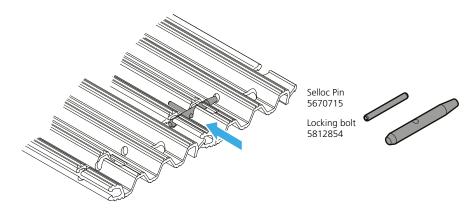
Drive Selloc Pin until flush with Locking bolt
